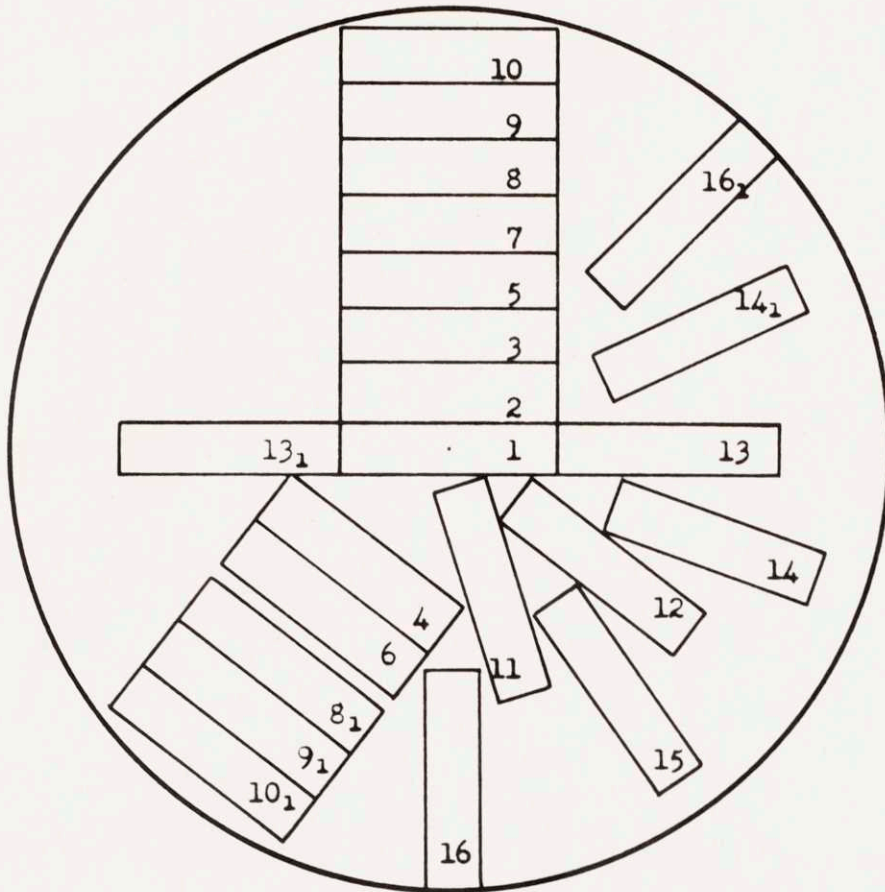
Layout of Gages in the Welded Disk. Figure is showing the actual Blocks cut free from the Disk. Numbers with Indices indicate duplicate Blocks.
